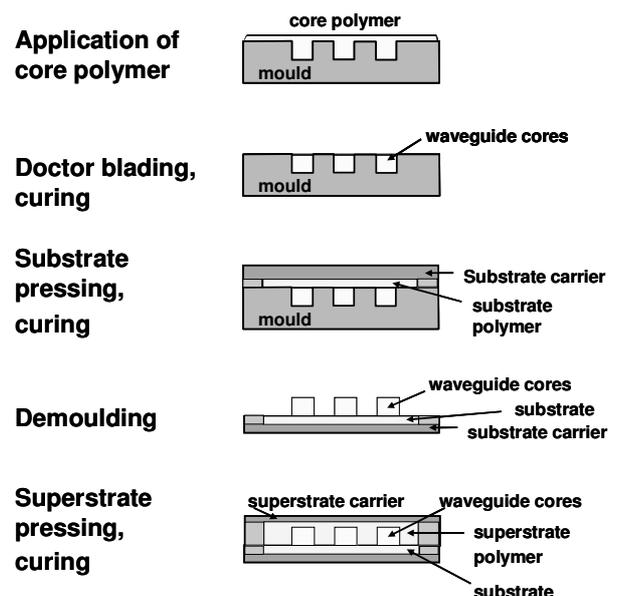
Scheme of fabrication process of optical waveguide layer embedded between two thin PCB carrier sheets (FR4 or Kapton)
